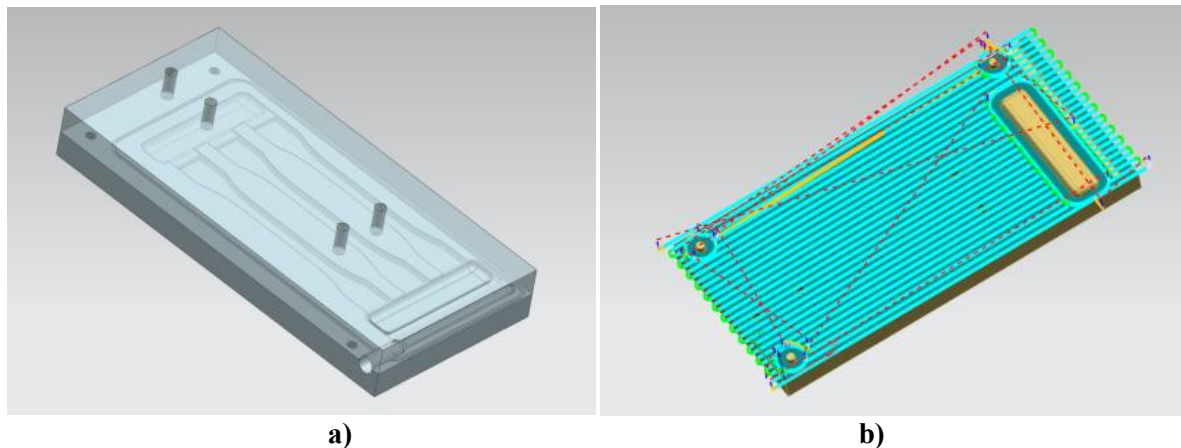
CAD model of mold (a) and CAM process for manufacturing cold injection molds (b).
